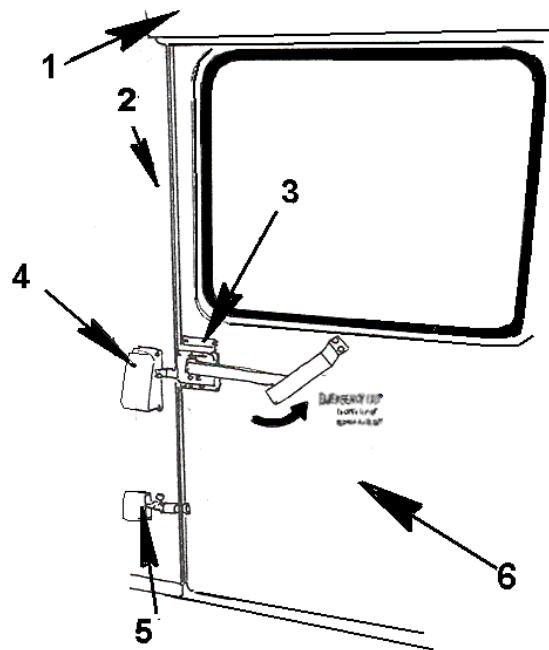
Rear Emergency Exit Window Assembly (Interior View Shown)
